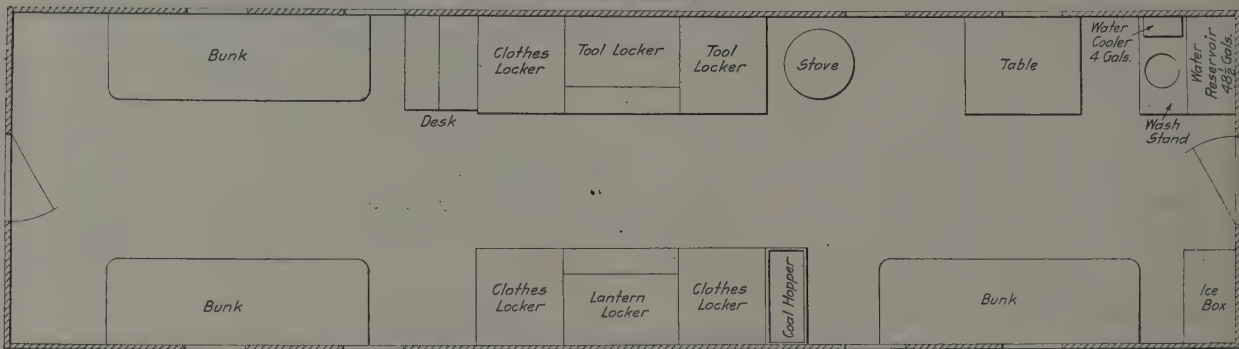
Floor Plan of Caboose Car Shown in Figs. 261-267.
